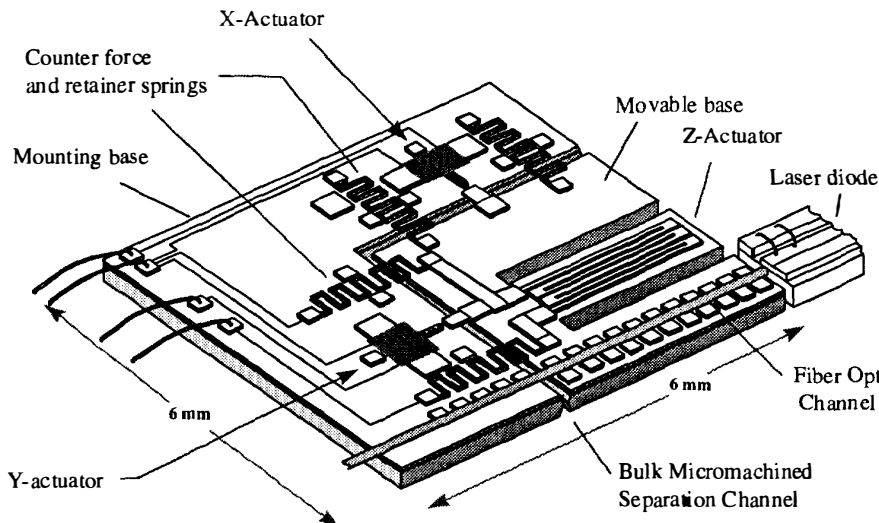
Mounted 3-axis in-package micro aligner (Design 3)
